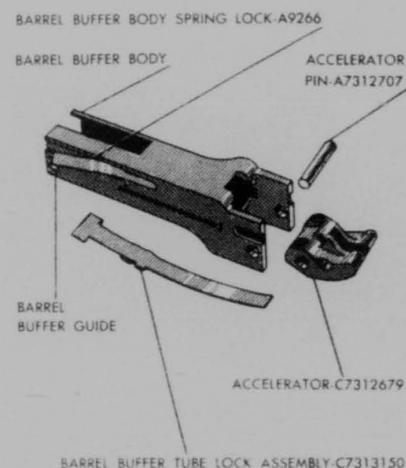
Barrel Buffer Body Group—Exploded View.
